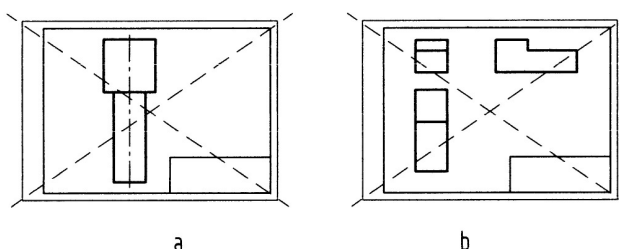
Wrong arrangement of mechanical parts on the main view:
